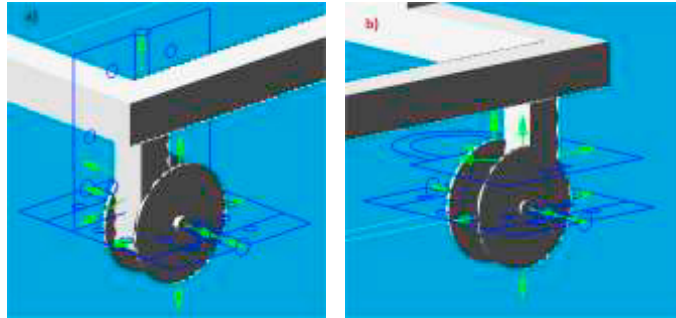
(a) Revolute joints for floating wheels; (b) Revolute joints for fixed wheels.
